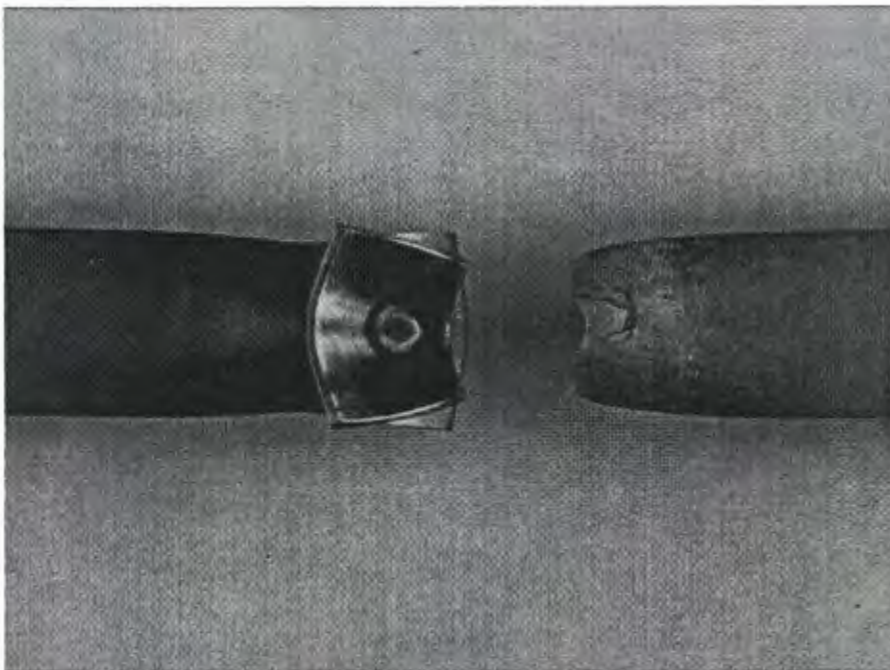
"Parent metal" failure of an improved spot weld tensile shear specimen; magnified 1 $\times$ .
